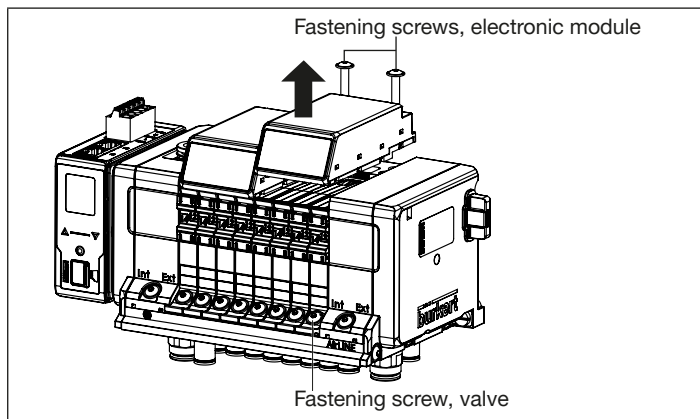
Replacing a valve without minimum distance to the front edge of the control cabinet
